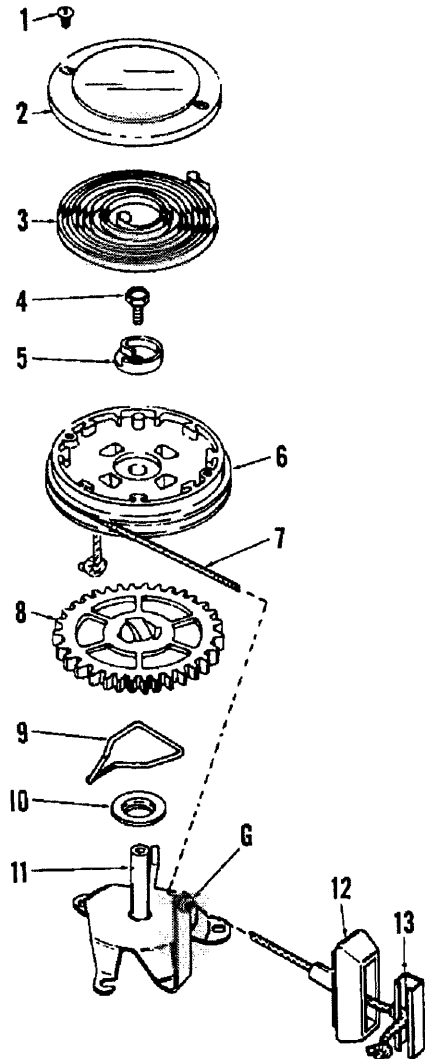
Exploded view of recoil starter assembly typical of all models.
